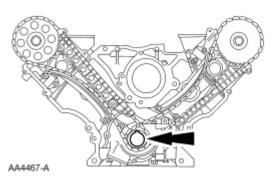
View Of Crankshaft Sensor Ring At Crankshaft Courtesy of FORD MOTOR CO.
